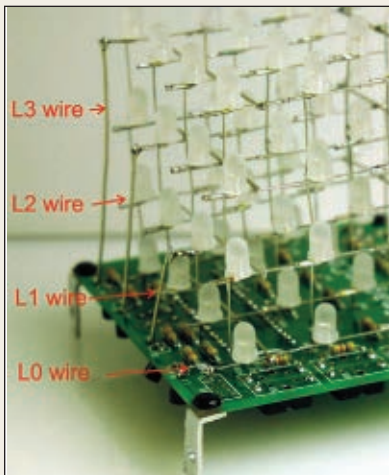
Connecting the common anodes to the PCB using tinned wire.
